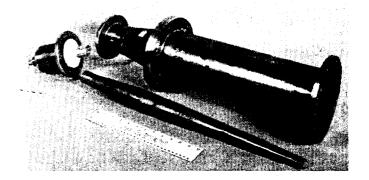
A set of three coaxial components used in the Assembly A form of the test fixture.
